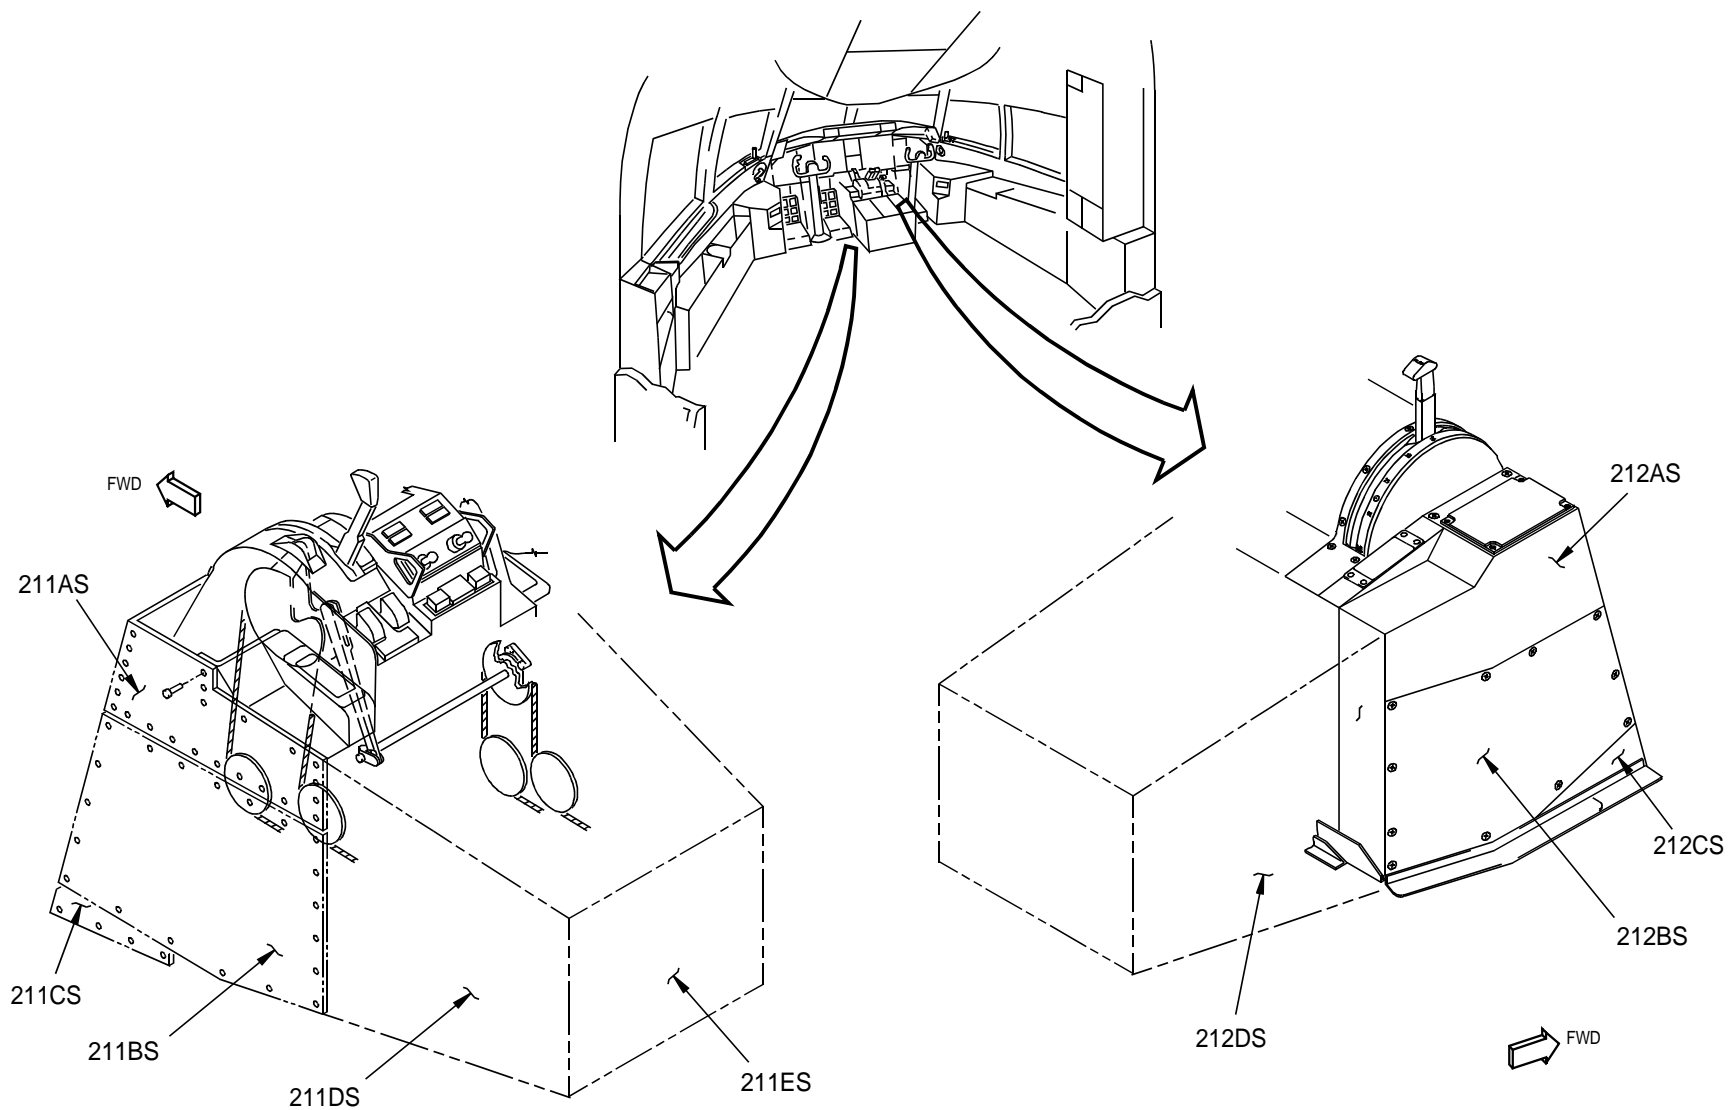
SUB-MAJOR ZONE 211/212 FLIGHT DECK SIDEWALL PANELS
